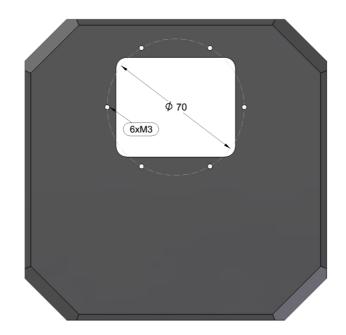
M3 threaded holes, used to mount the "XL" sized EFW, on the asymmetrical C5A camera head
